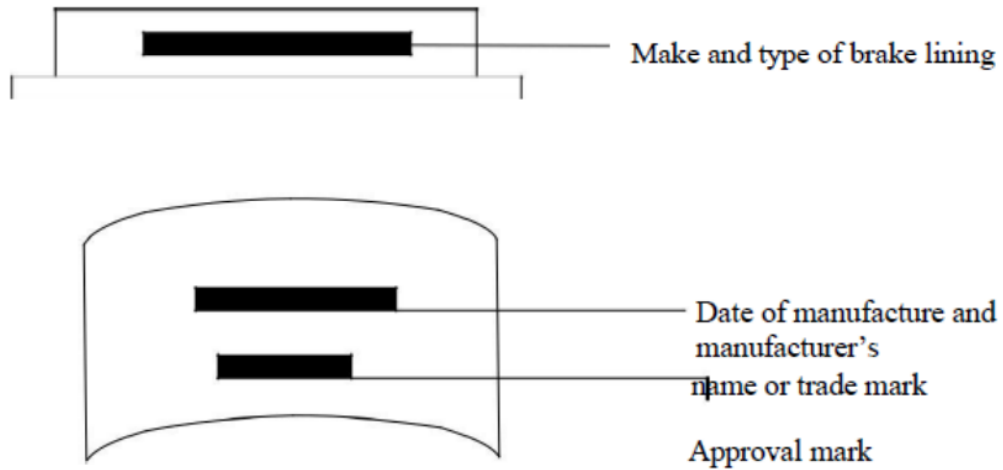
EXAMPLES OF PAD ASSEMBLY MARKING
